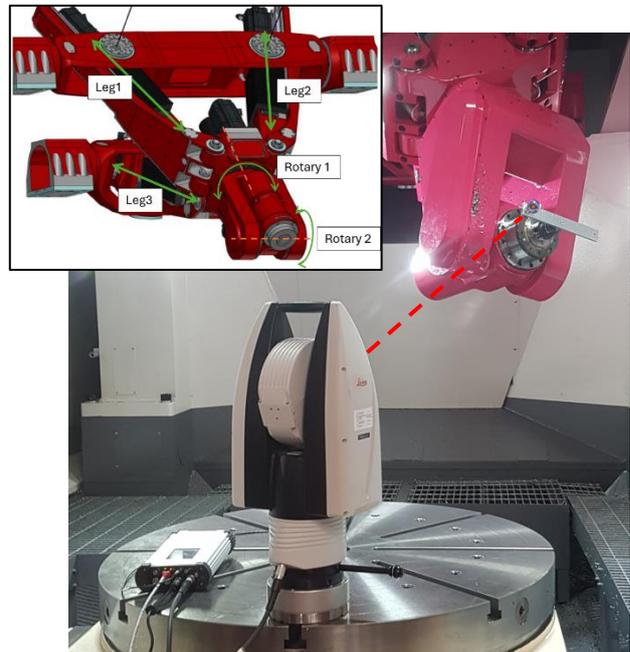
Laser tracker measuring SMR on spindle (inset shows overview of machine configuration)
